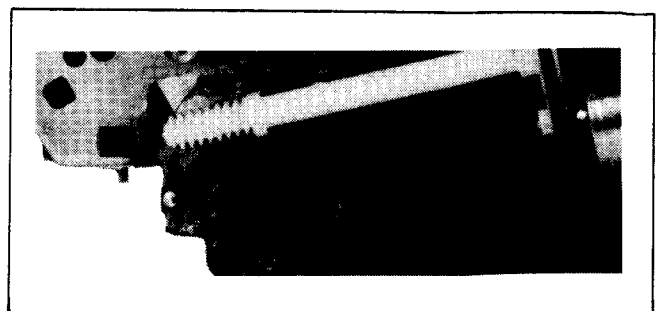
Adjustment of Cassette Up Gears-(1)
